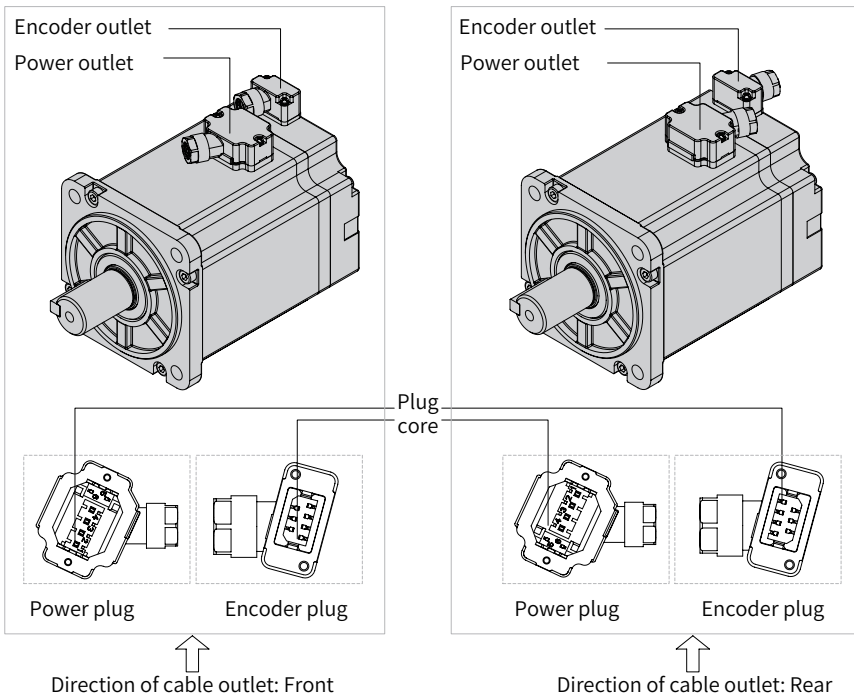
Models of Z series (terminal-type) motors with front or rear cable outlets
